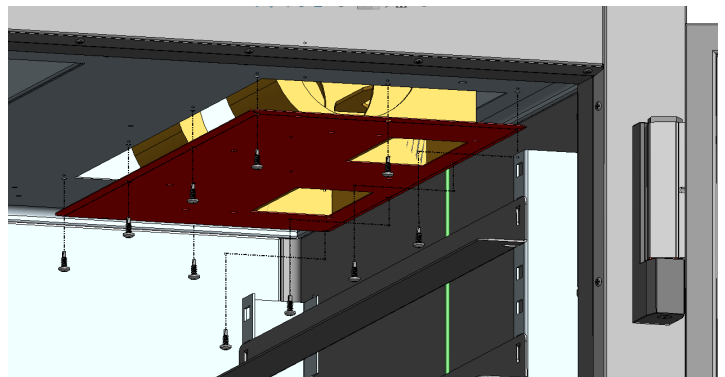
B.9.1c Evaporator Fan Assembly Removal
